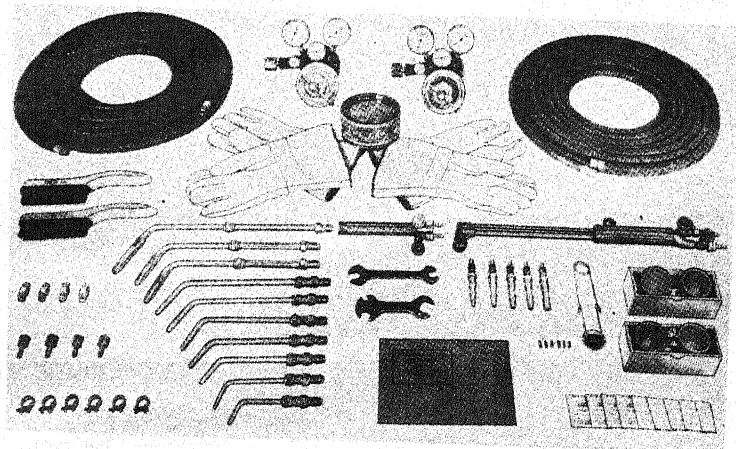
Smith oxyacetylene welding and cutting outfit.
